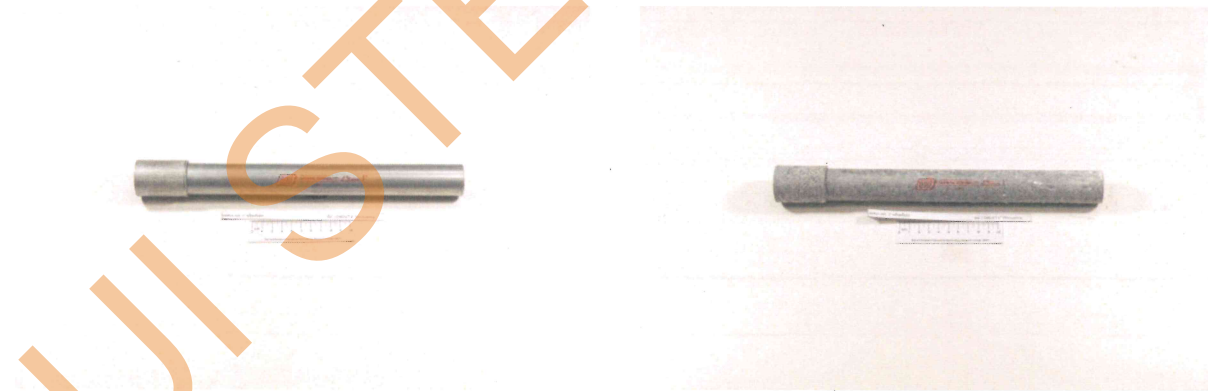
IMC CONDUIT 1/2" W/coupling before-after salt spray test.
